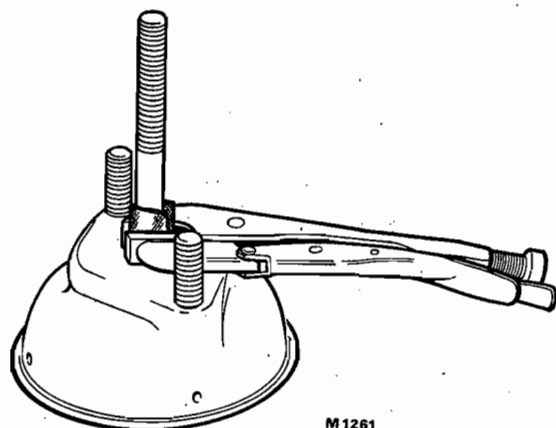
METHOD OF CLAMPING THE PUSH ROD PRIOR TO REASSEMBLY
